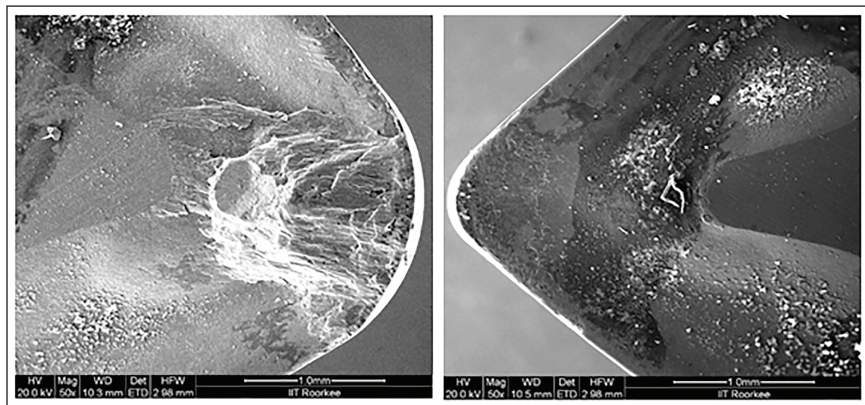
Wear of Tungsten Carbide Inserts Used in Experiments.
